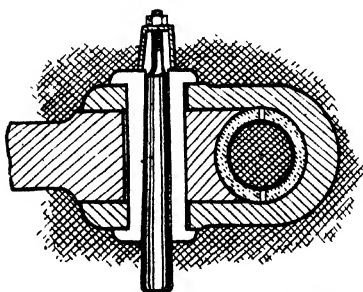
CONNECTING-ROD BEARING ADJUSTMENT
